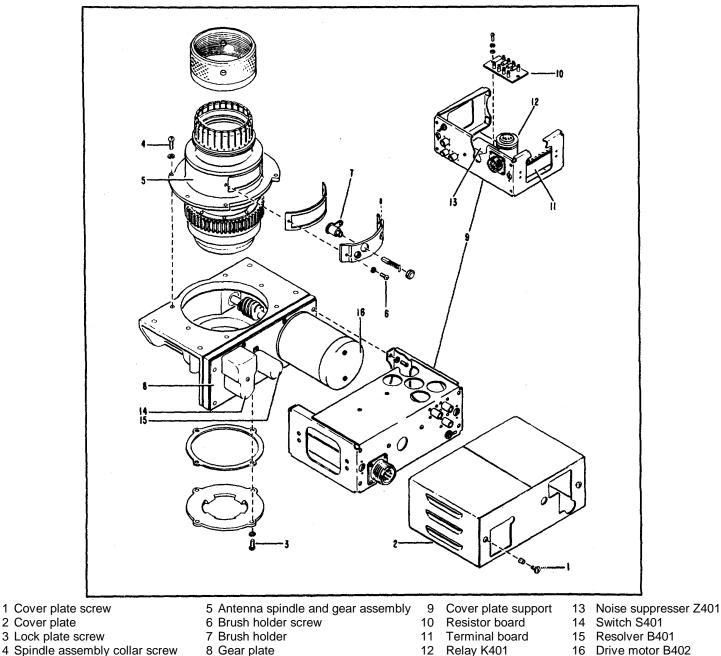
Azimuth Indicator Dial Drive Subassembly, Disassembly
